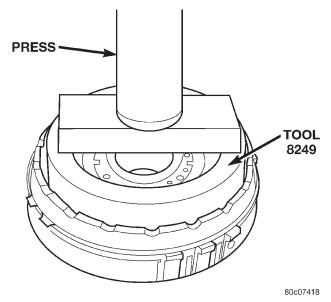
Compress 2C Belleville Spring Using Tool 8249
